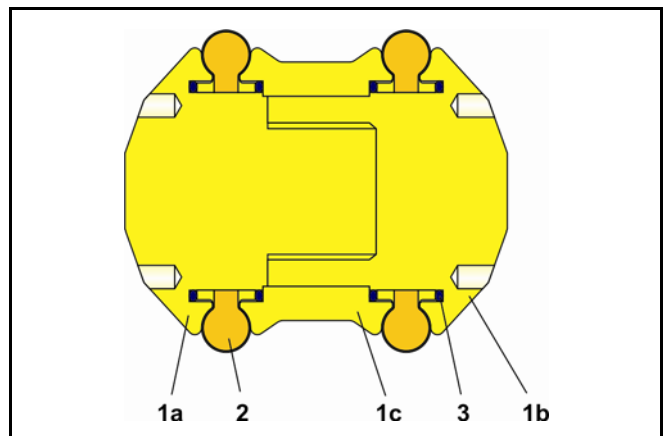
Sectional view of a TWIN 3 pig => Parts list, see Table 2 on page 3
